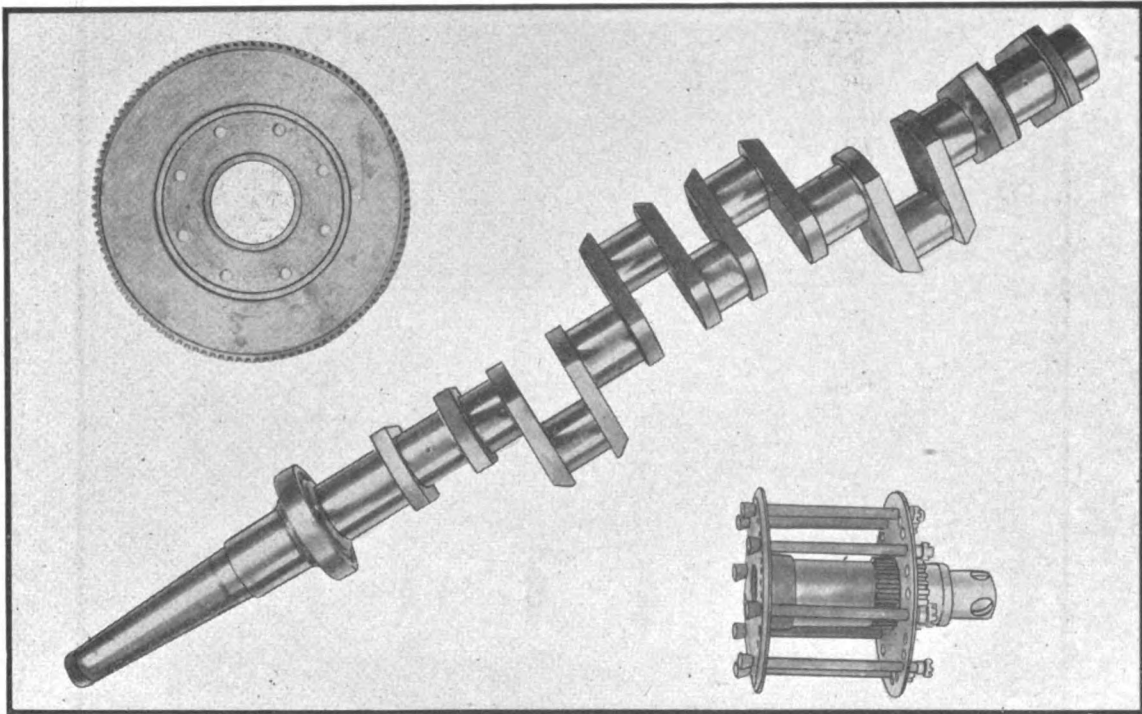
Crankshaft, propeller hub, and starting gear.
